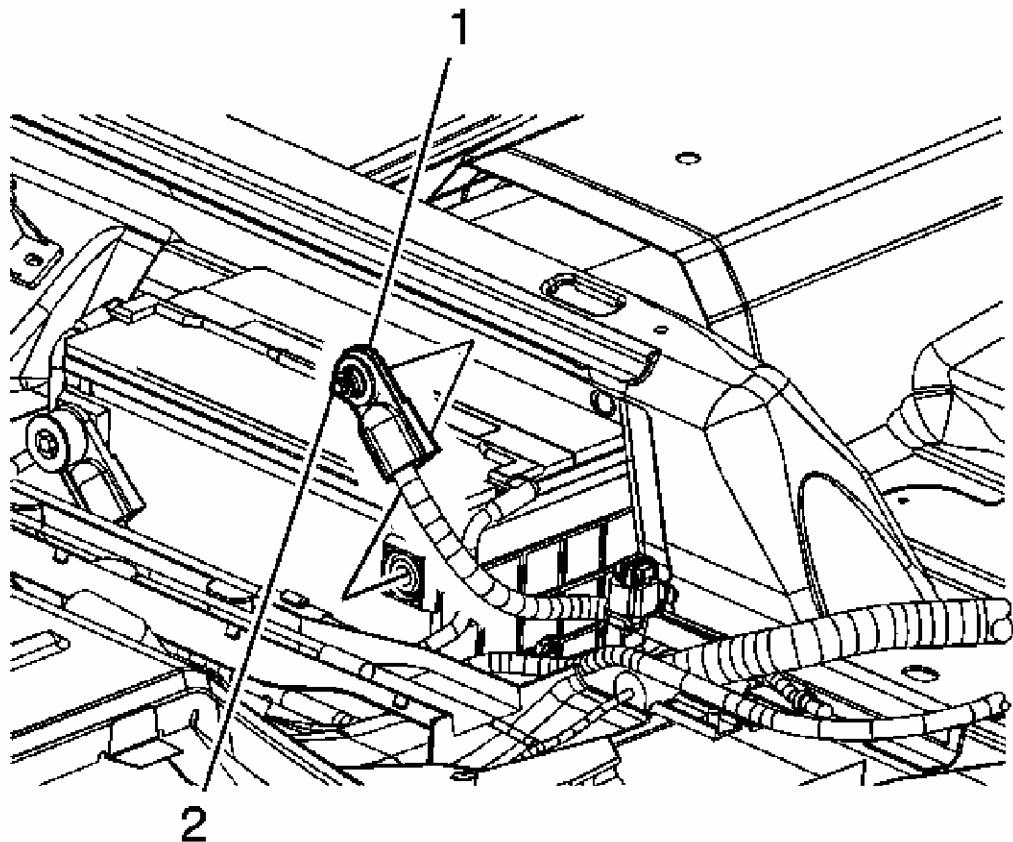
Locating BatteryCourtesy of GENERAL MOTORS CORP.
